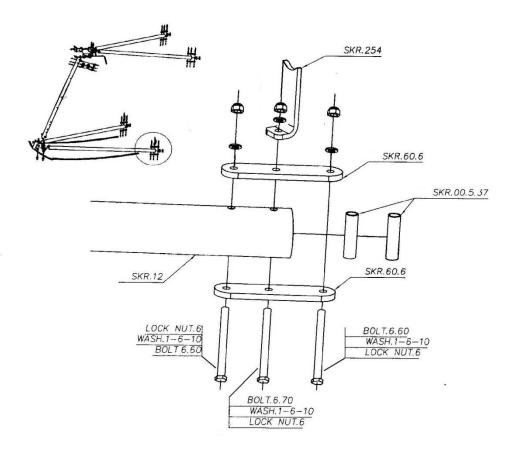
lower cabin triangle, rear of tube tu12 (note, find SKR254 in assembly bag A9)
